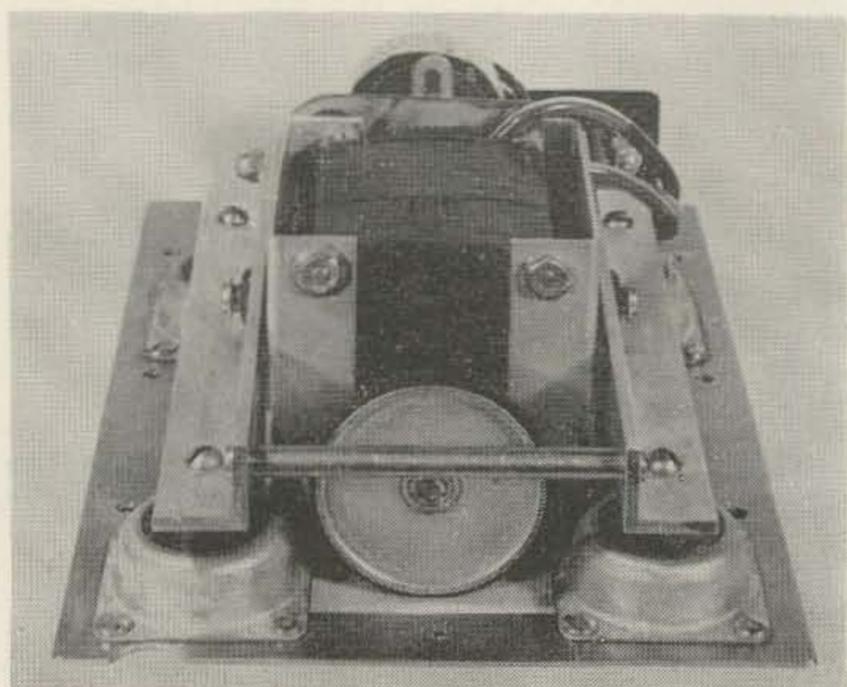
Drive wheel and motor mounting. Note window in bed plate so that drive wheel can contact tuning flywheel of receiver.
